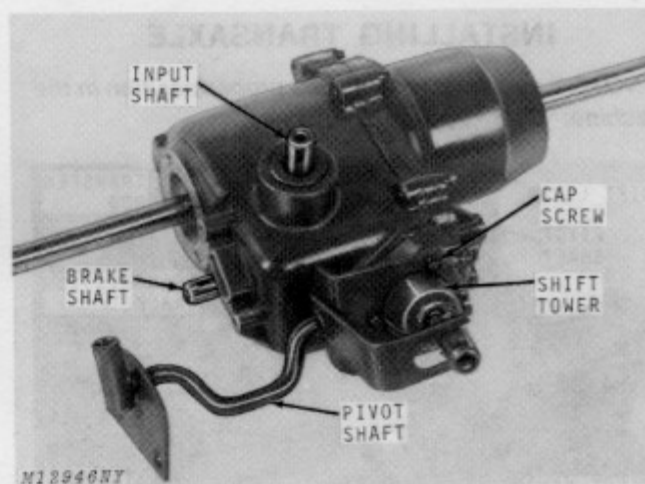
Installing Shift Tower and Pivot Shaft Assembly
